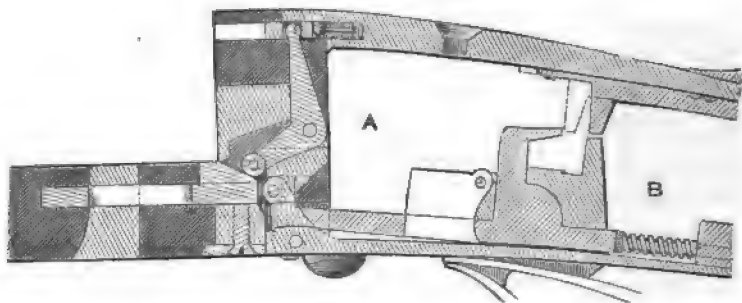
SECTION OF WEBLEY'S SIDE-LOCK HAMMERLESS GUN (two-thirds size).
